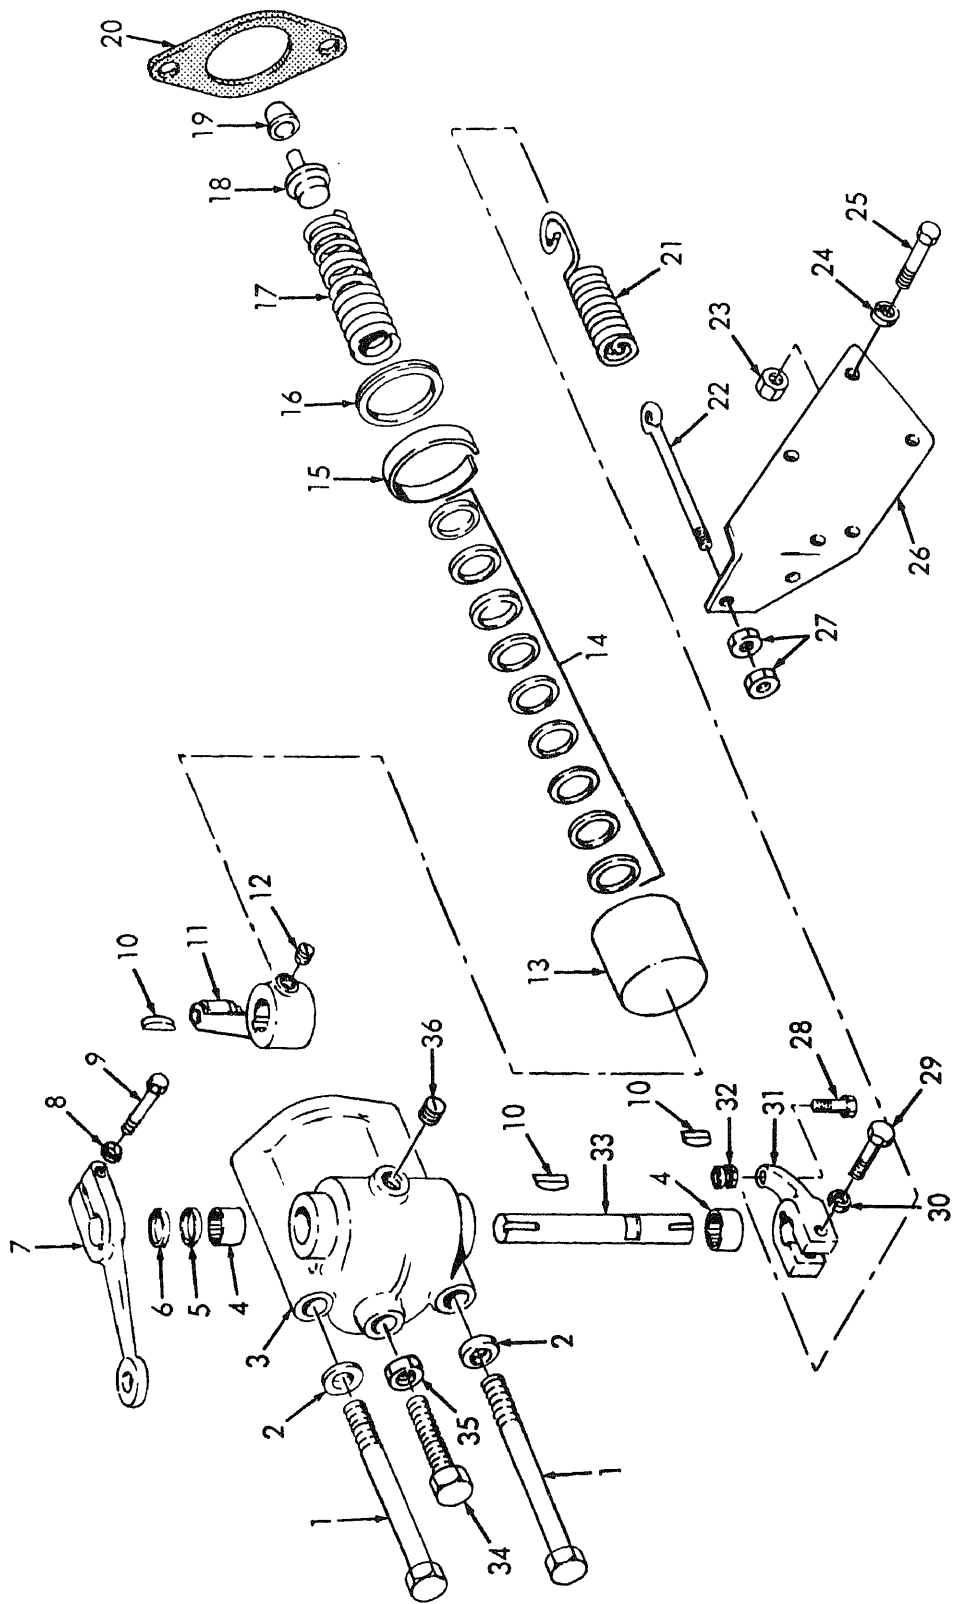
Variable speed governor spring housing assembly, exploded view.
